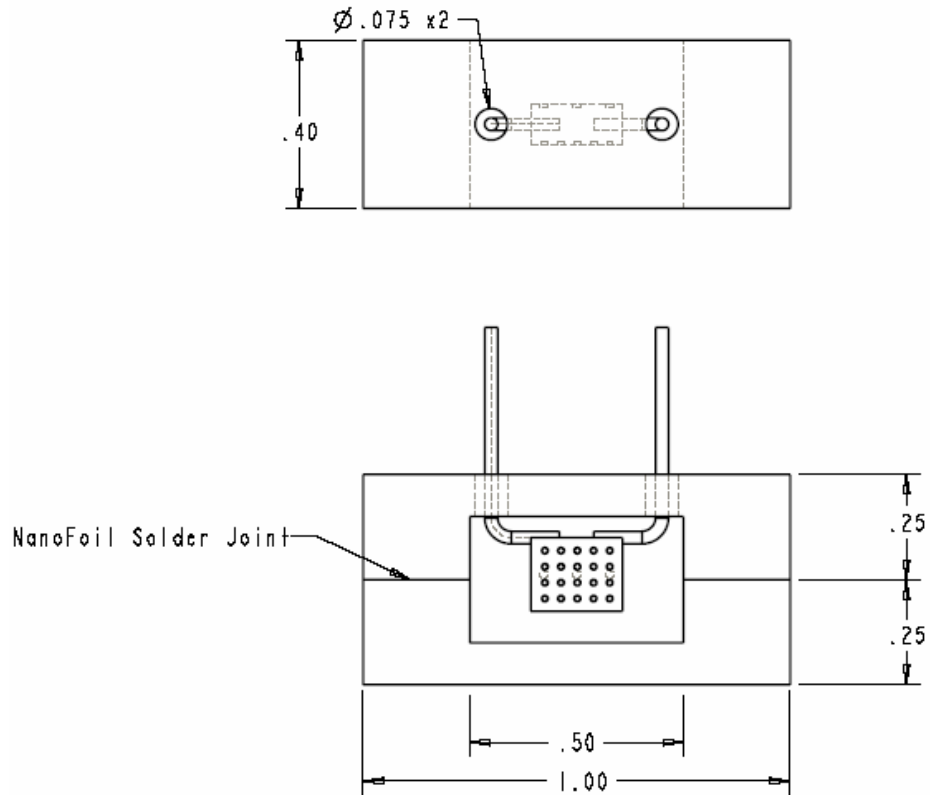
A drawing of the acoustic test package showing relevant dimensions
